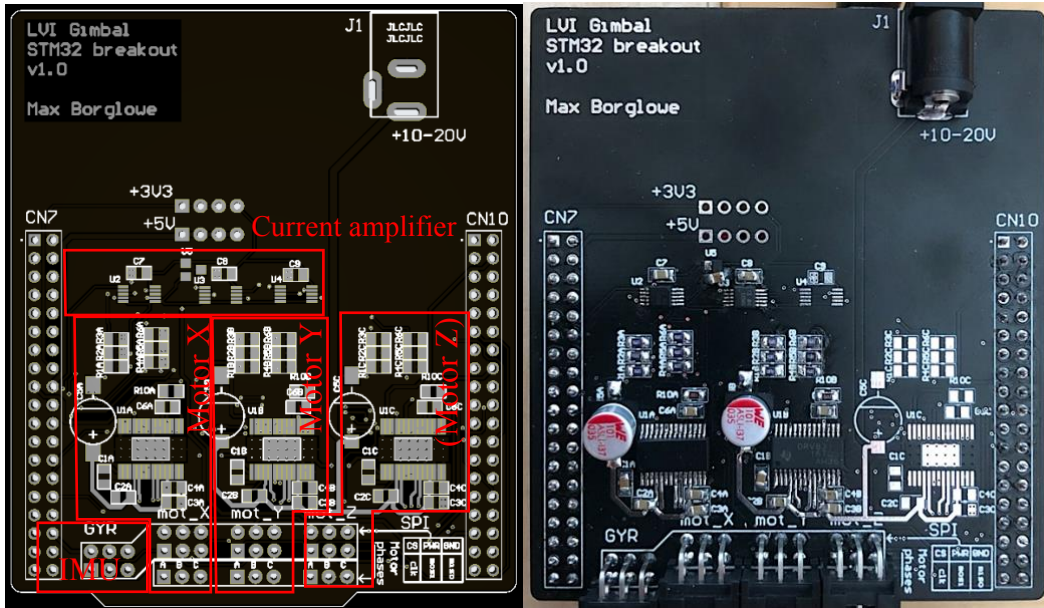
Gimbal driver shield with combined breakout board components. PCB layout (top-view). Right: Manufactured PCB with soldered components. The Motor Z components are not in place.
